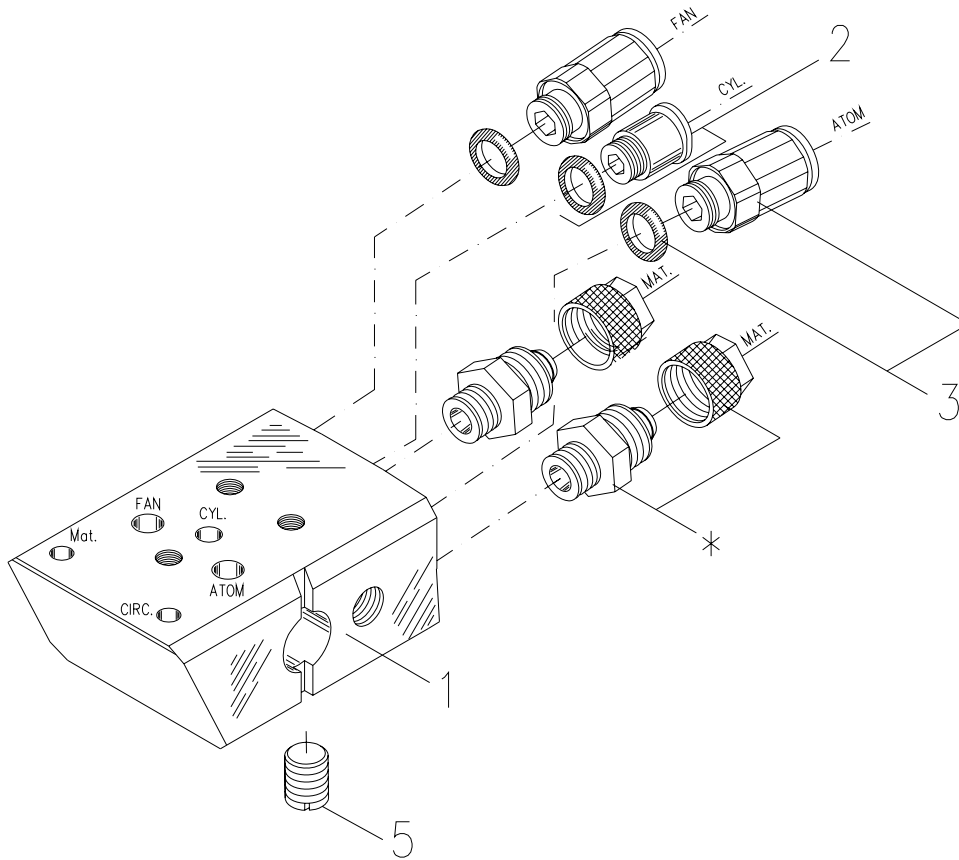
AGMD-251 Machine Adapter Assembly Parts Identification
